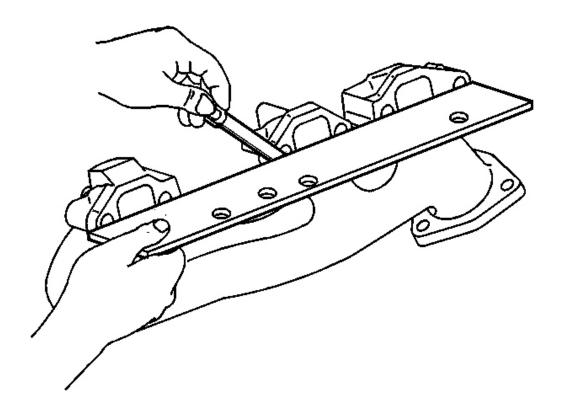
Measuring Exhaust Manifold Flanges Alignment Courtesy of GENERAL MOTORS CORP.
